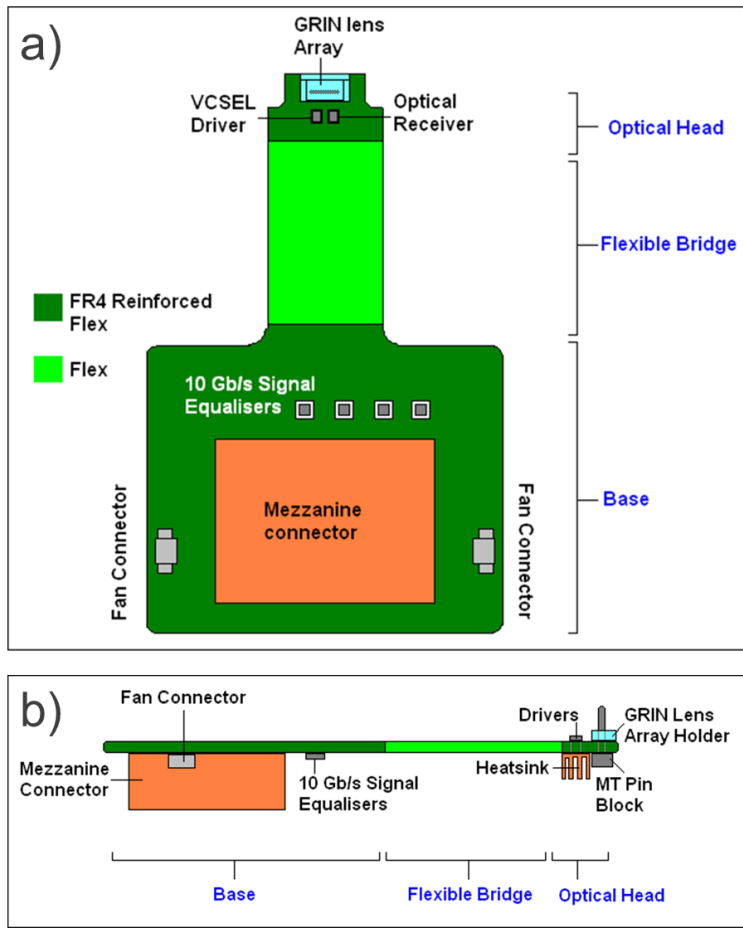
StorConn2 component layout: a) top view, b) side view
